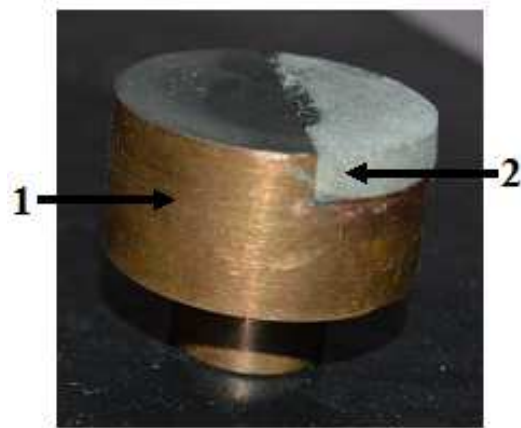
Photographic view of 2nd developed Hybrid Electric Discharge Machining Electrode
